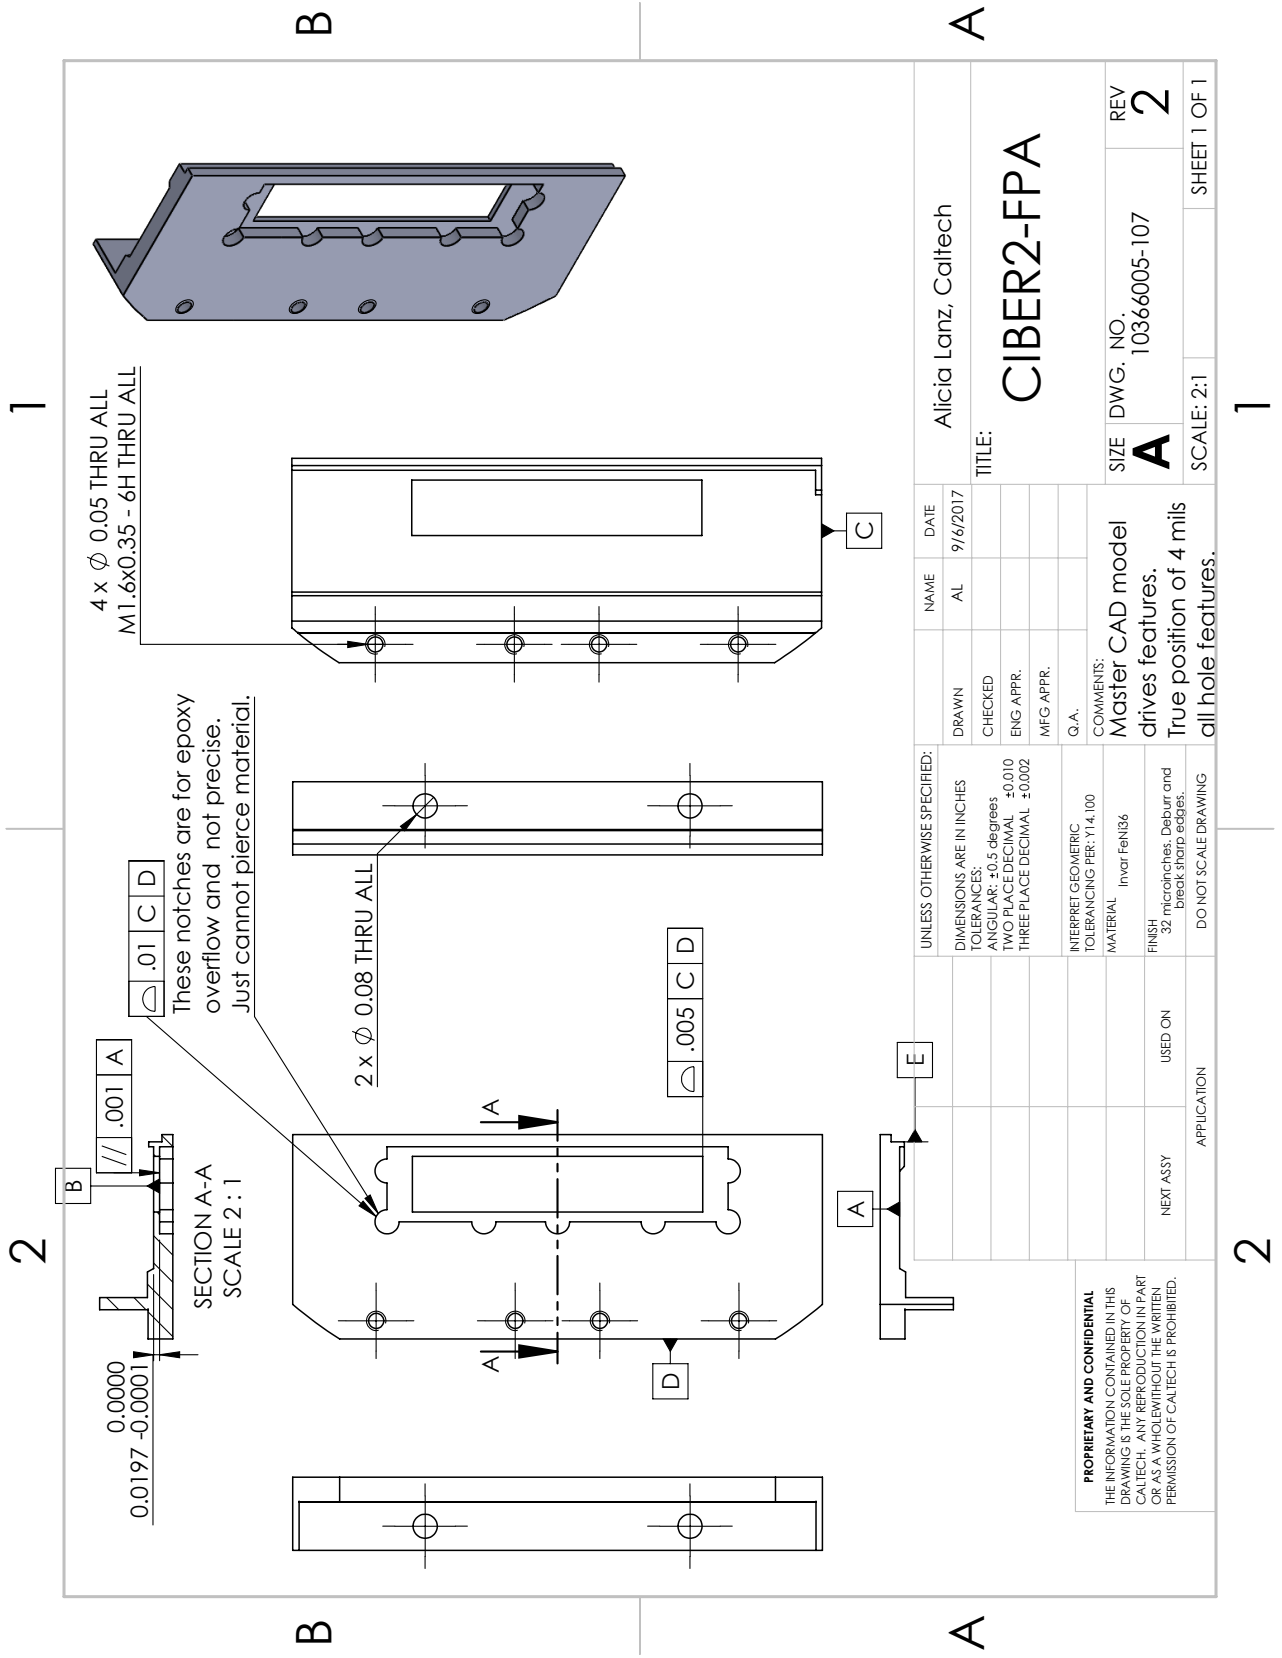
Mechanical drawing for flight version of the CIBER-2 focal plane assembly linear variable filter holder.
